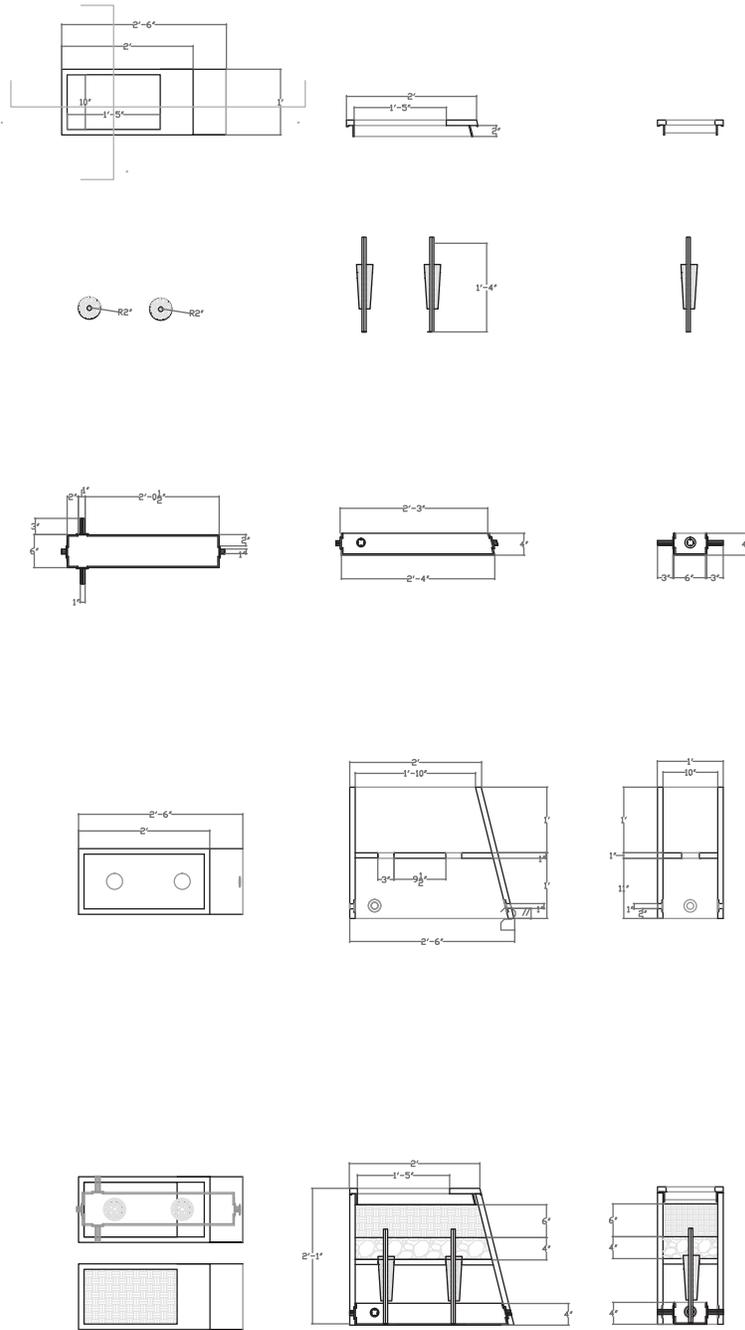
FIGURE XIV: MEDIUM PLANTER INTERNAL DETAILS
